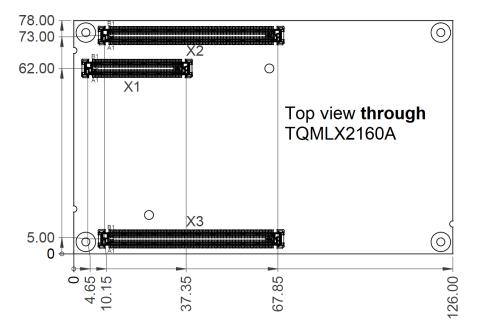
TQMLX2160A dimensions, top view through TQMLX2160A
